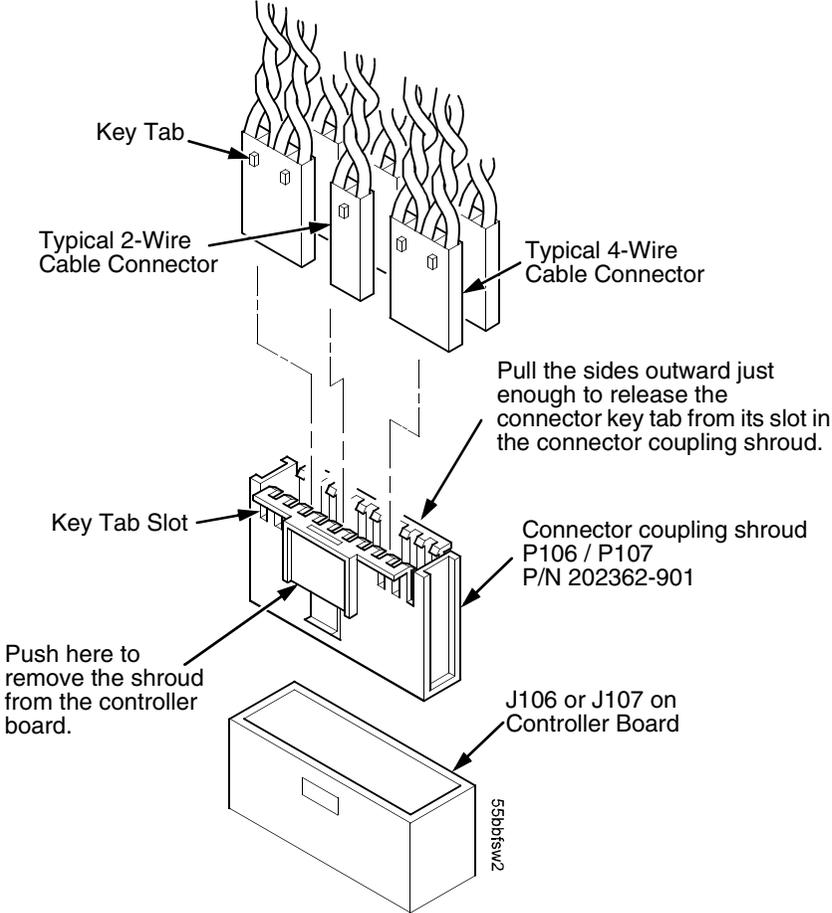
Connector Coupling Shroud, Disassembly/Assembly
